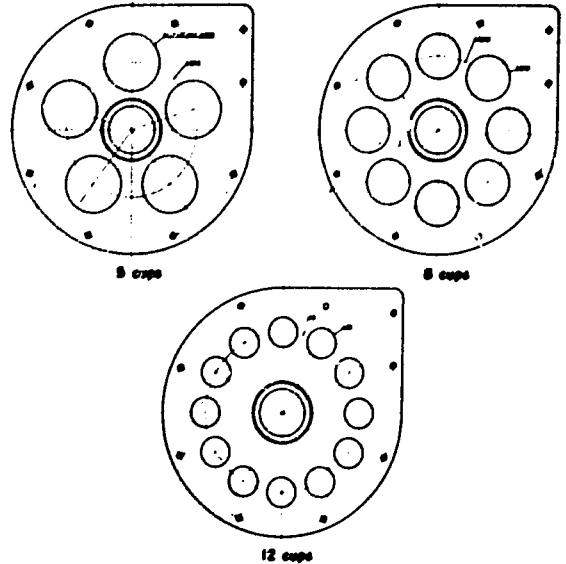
Technical drawings of the 5, 8, and 12 cup dehulling headplates for the TADD.
